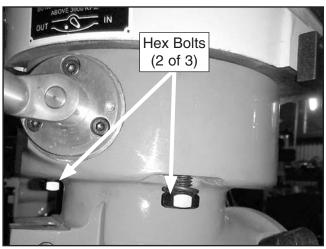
Location of hex bolts that secure headstock to spindle housing.
